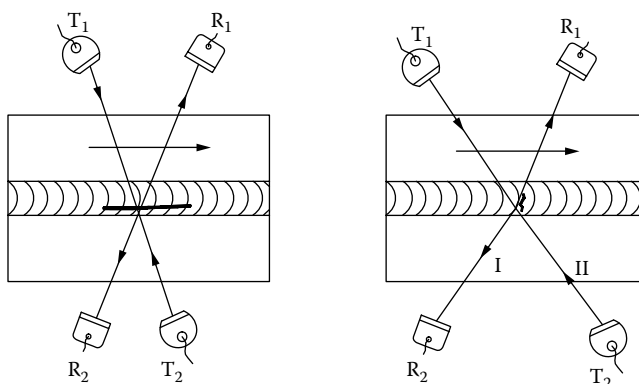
Position of probes for inspection of Butt welded surfaces—tandem technique.
